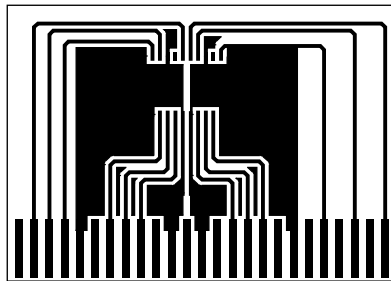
PCB used for thermal tests; heat sink area 400 mm²
